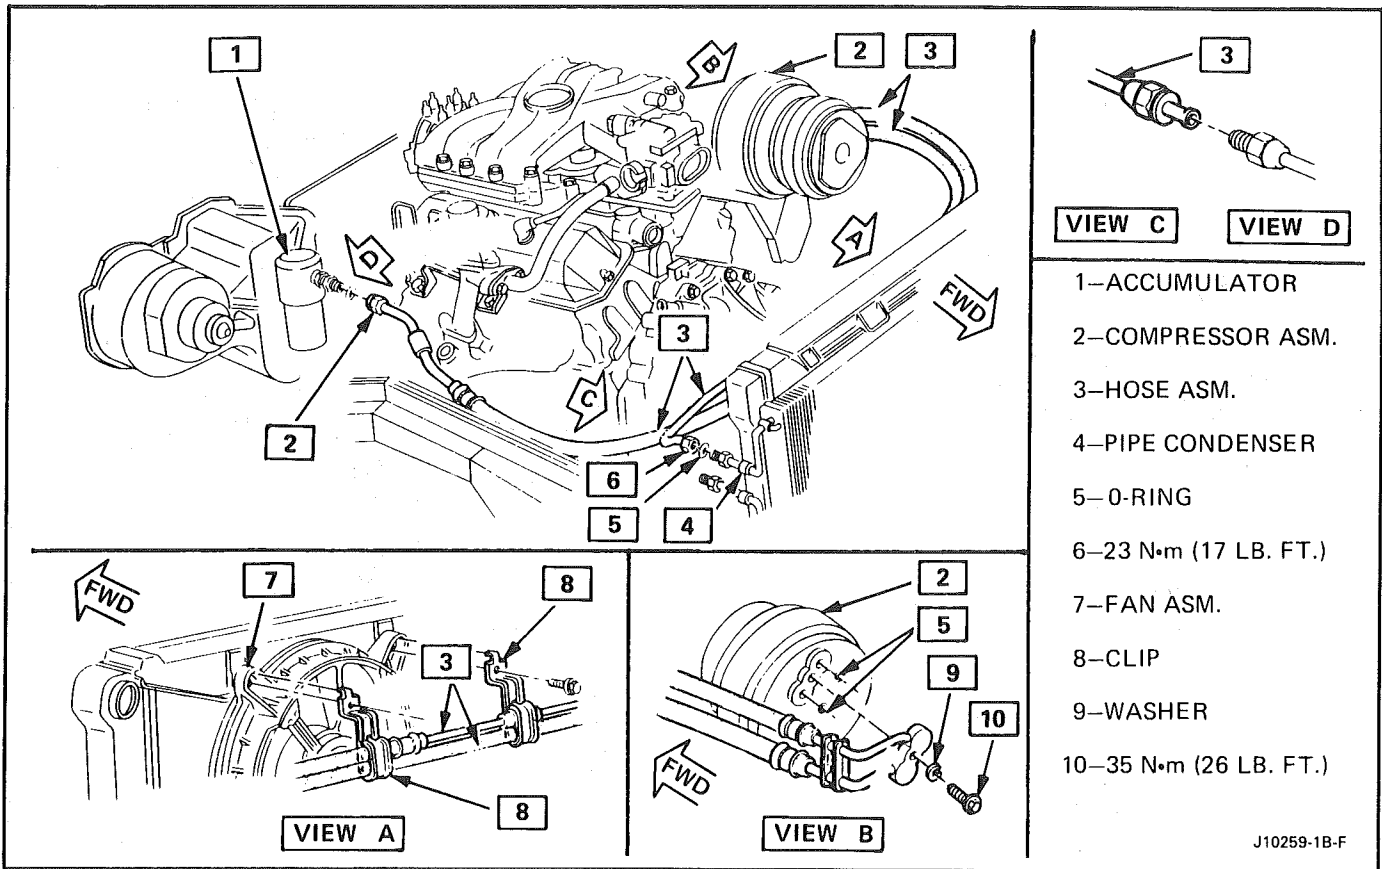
A/C Compressor & Condenser Hoses — V.I.N. S
